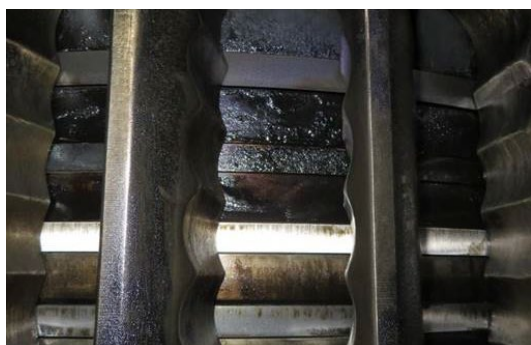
Heavy deposits formation on piston ring lands and collapsed piston rings.
